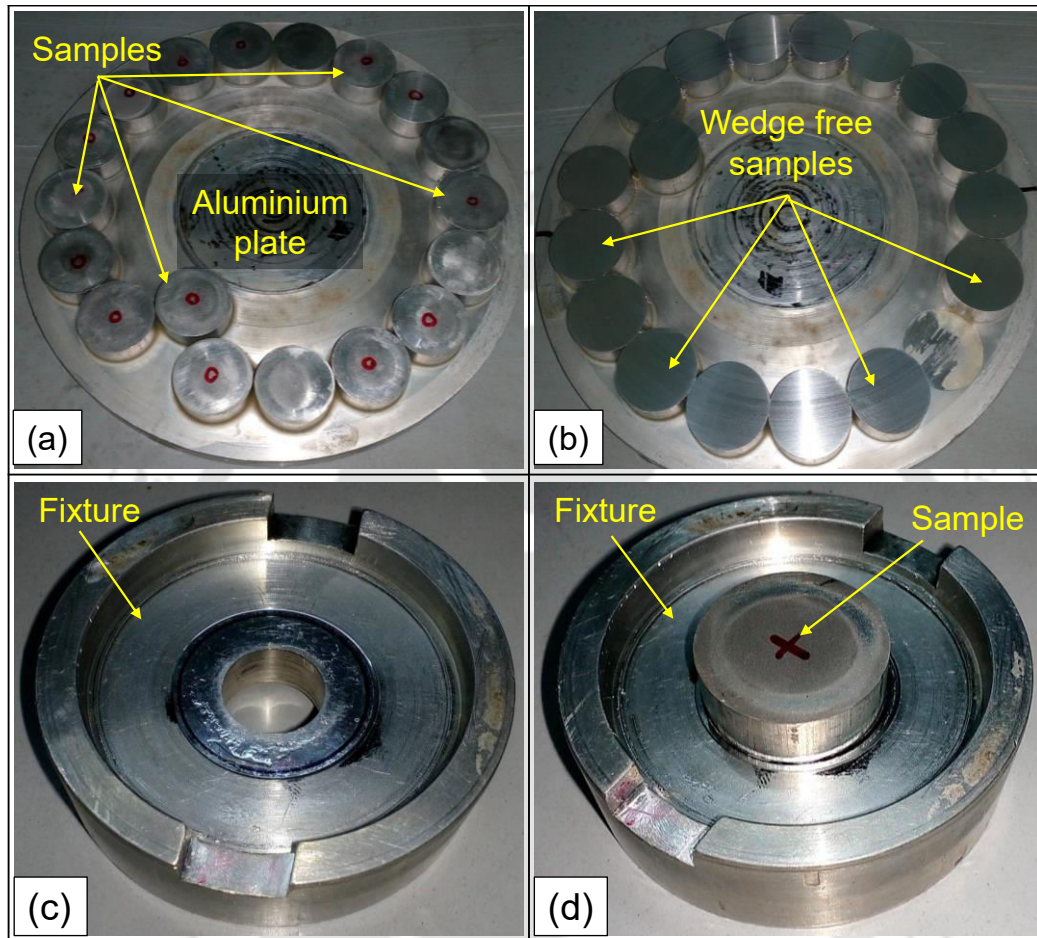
(a) Fixing of the samples to a large aluminum plate, (b) Samples after removing the wedge, (c) Fixture to hold the sample and (d) Sample with fixture
